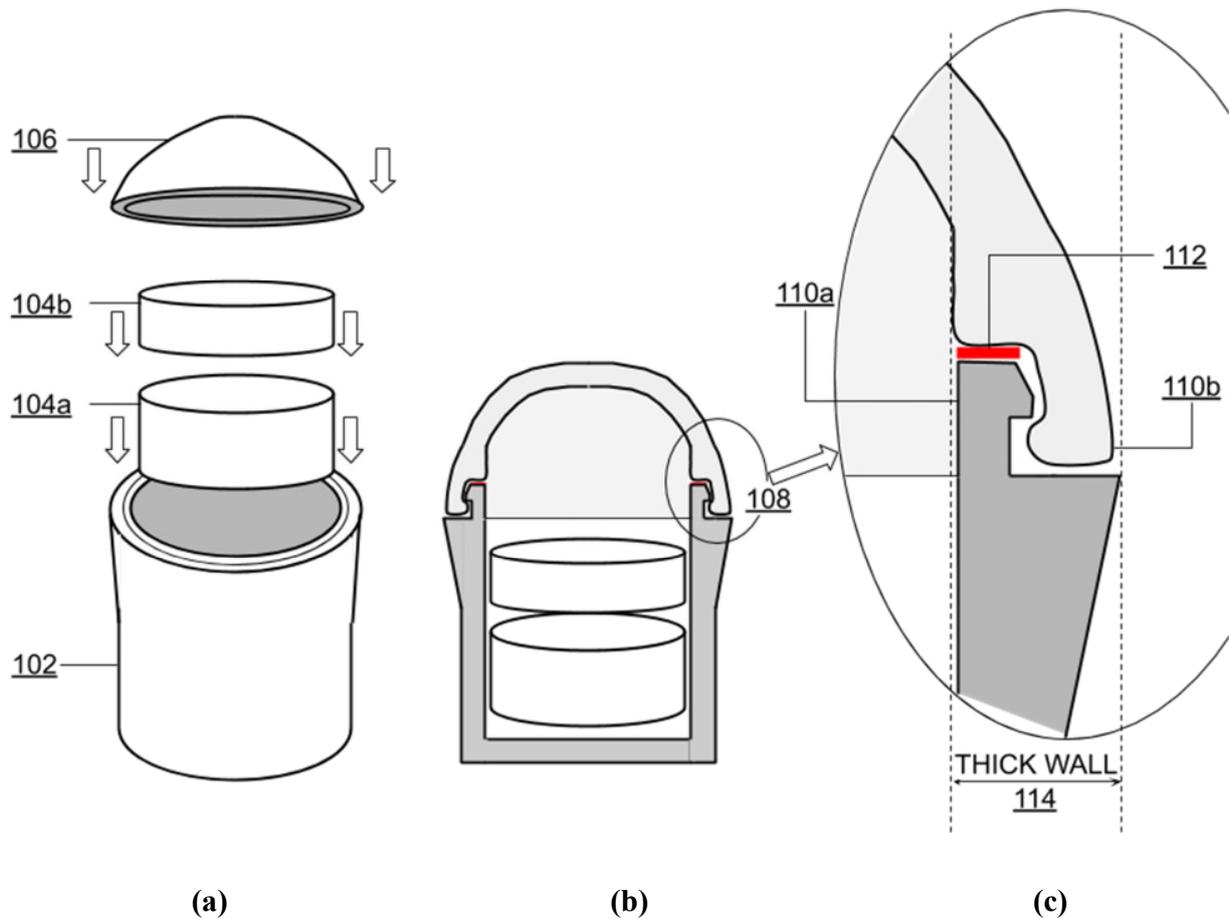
An earbud (a) Exploded view; (b) Cross-sectional view; (c) Expanded, cross-sectional view of the housing-cap interface
